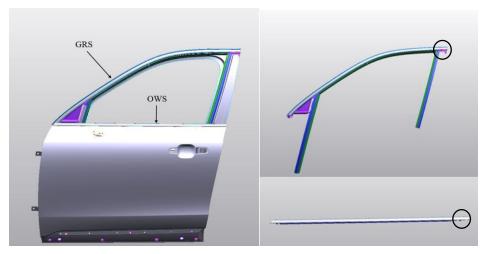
Left picture: GRS, OWS assembled on door. Upper right picture: GRS. Lower right picture: OWS.
